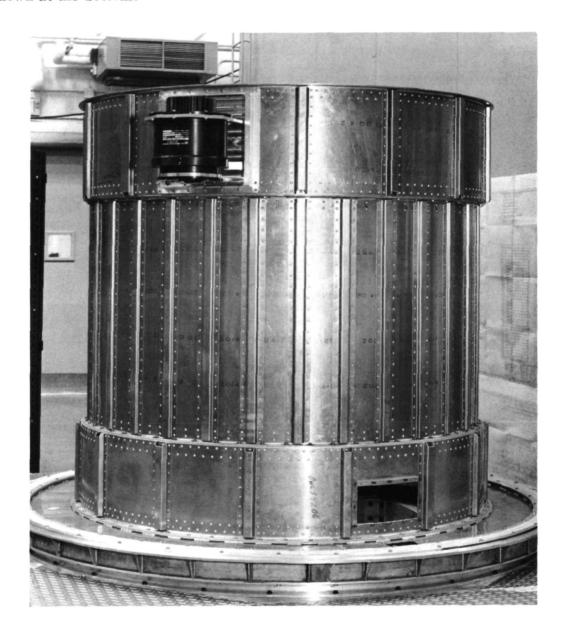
Inner Gimbal Motor/Driver Installation
